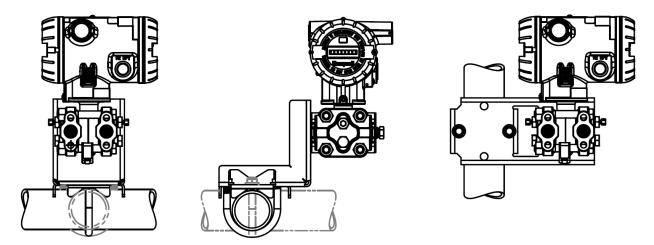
Dual Head Gauge, example of typical mounting positions (antenna omitted)
